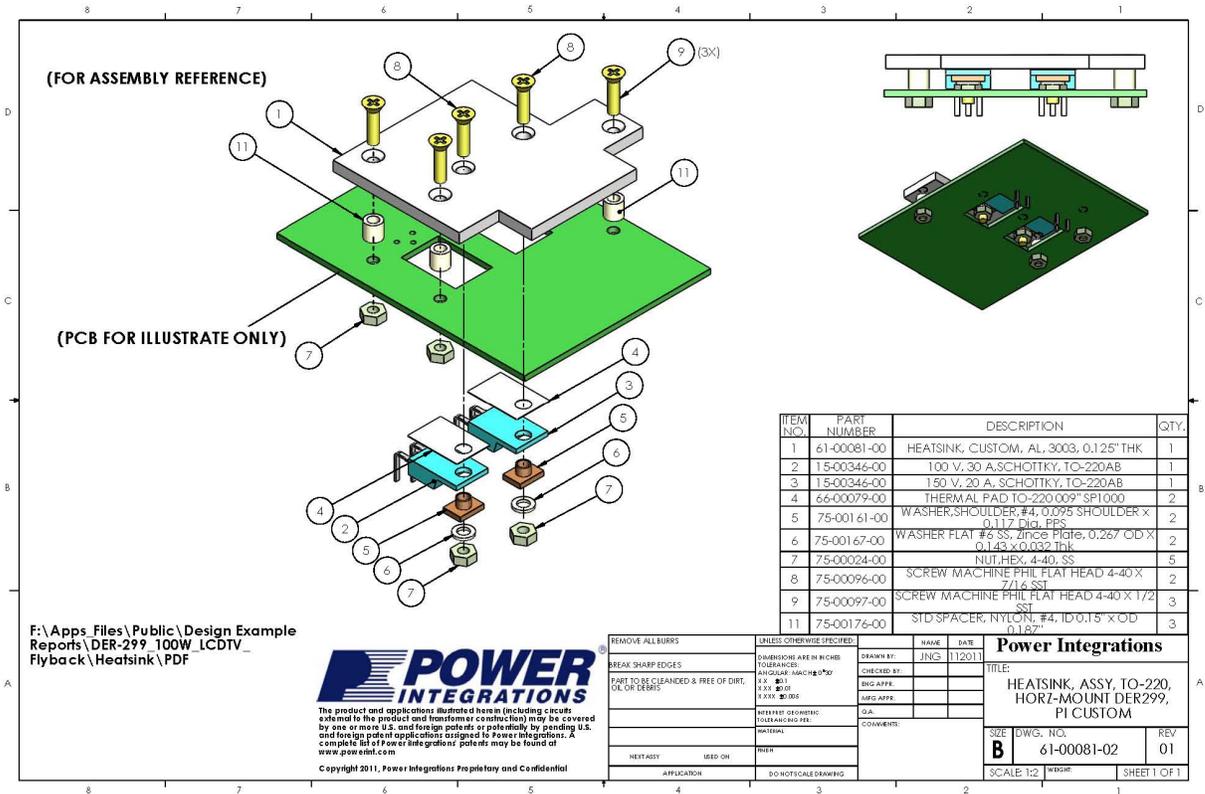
Heat Sink Assembly Drawing for D1 and D2.
